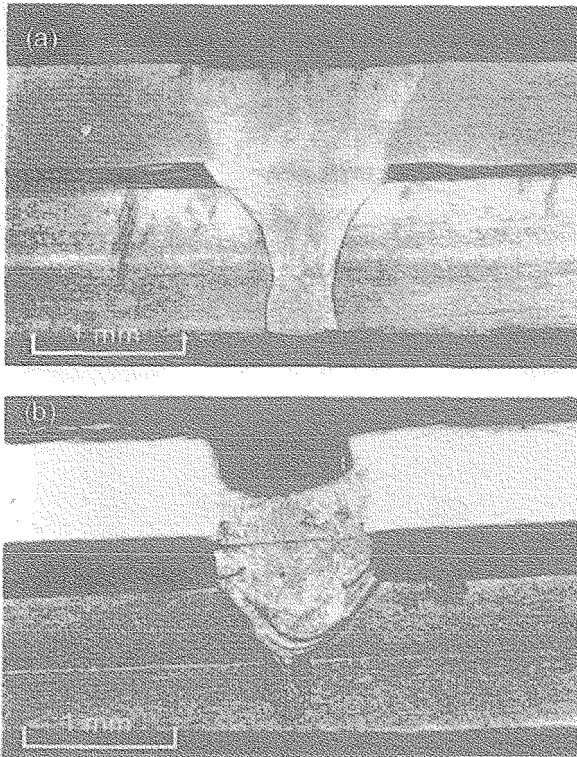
Photographs of laser weld cross sections produced using (a) 0.1 mm and (b) 0.3 mm gap between the sheets
